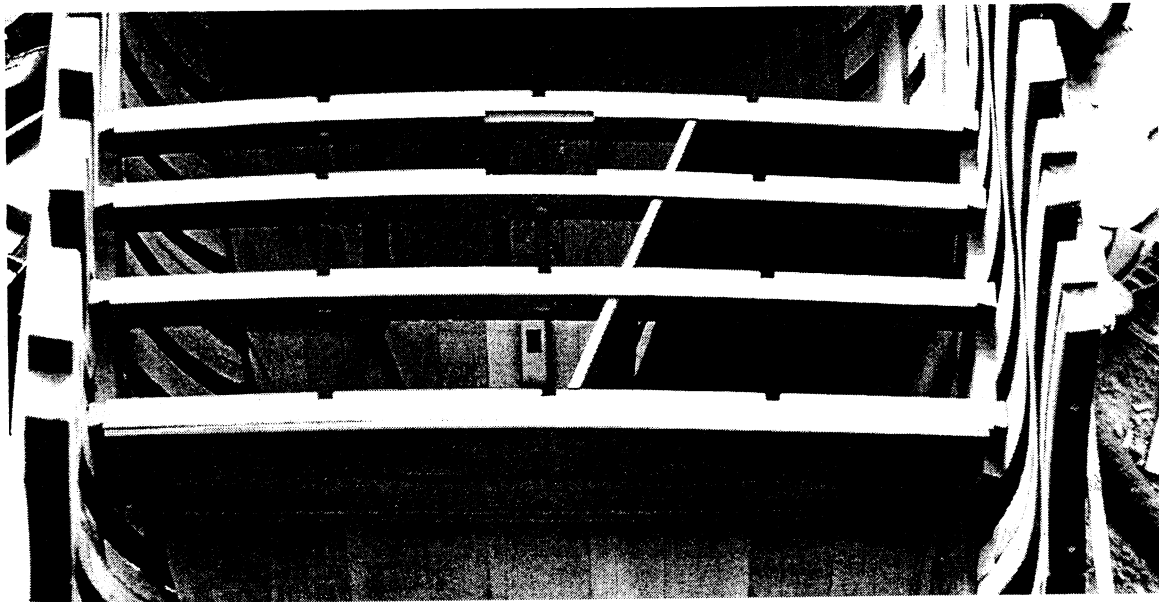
After deck beams installed. Note the notches cut in the forward and after faces of the beams for the longitudinal carlings. Photo by G. Grieco.
